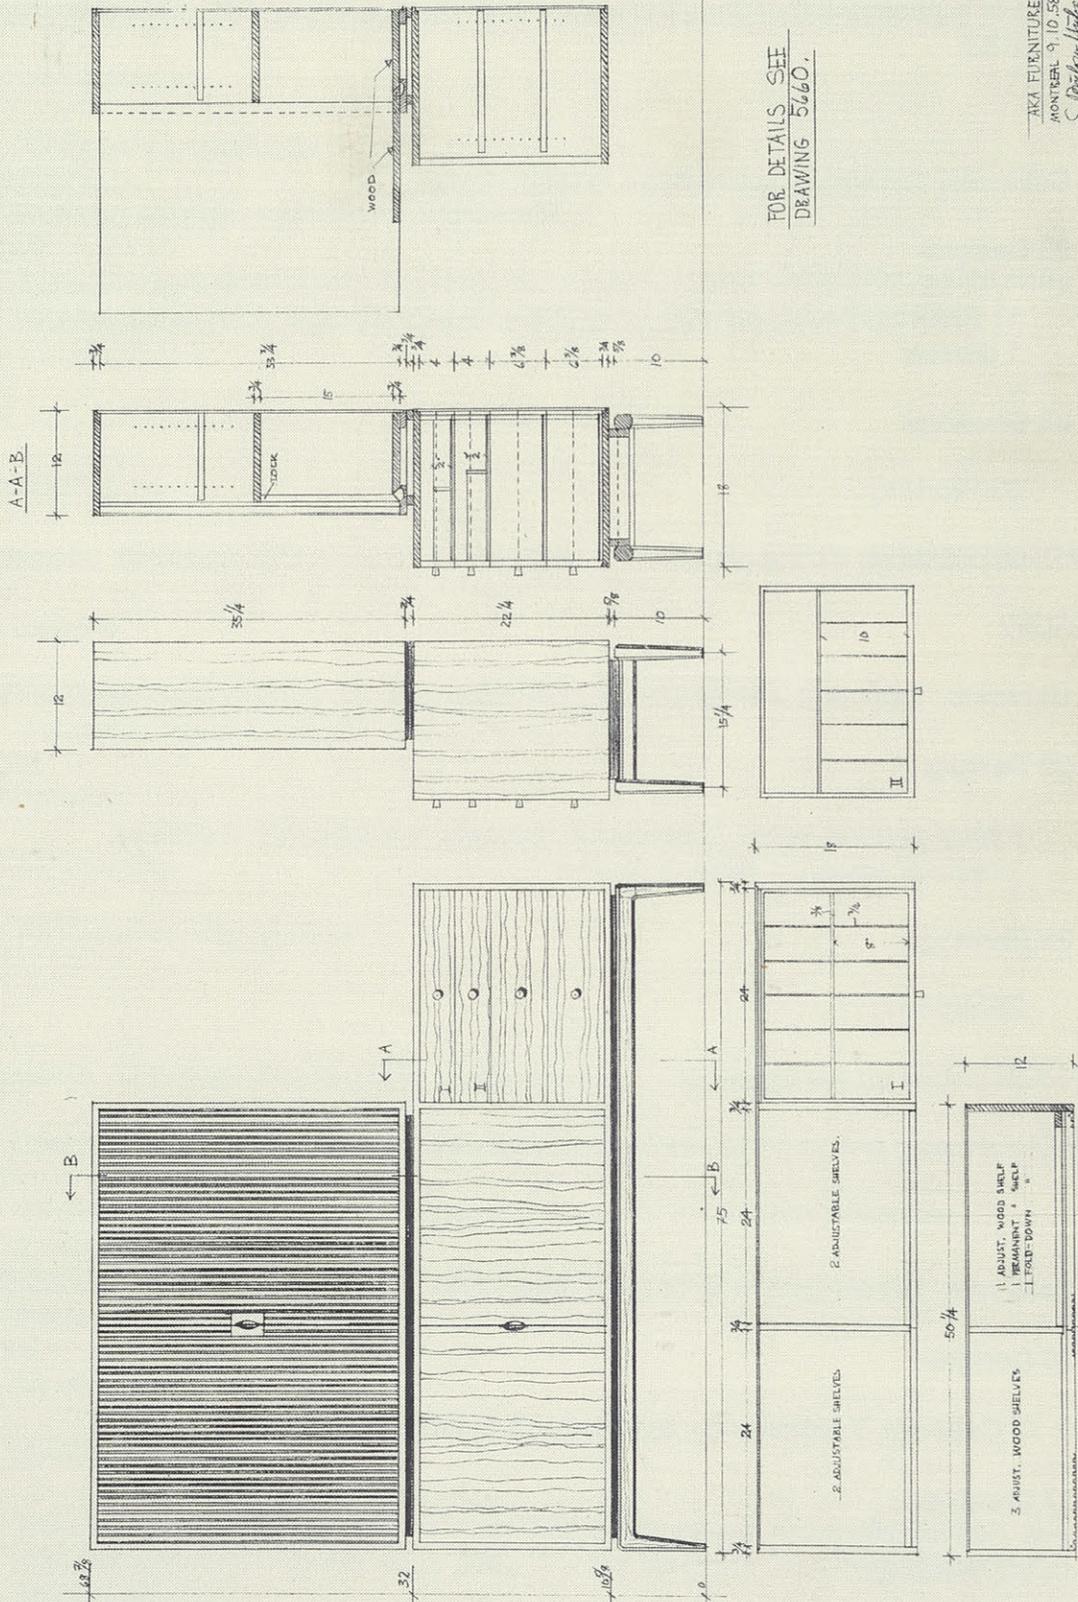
Working drawing for sideboard with top cabinet 5682. Pencil on tracing paper.
